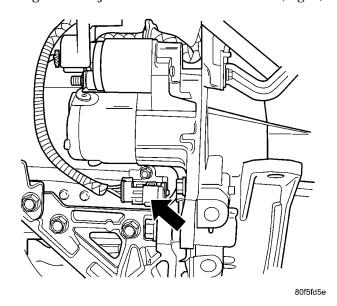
CRANKSHAFT POSITION SENSOR LOCATION
